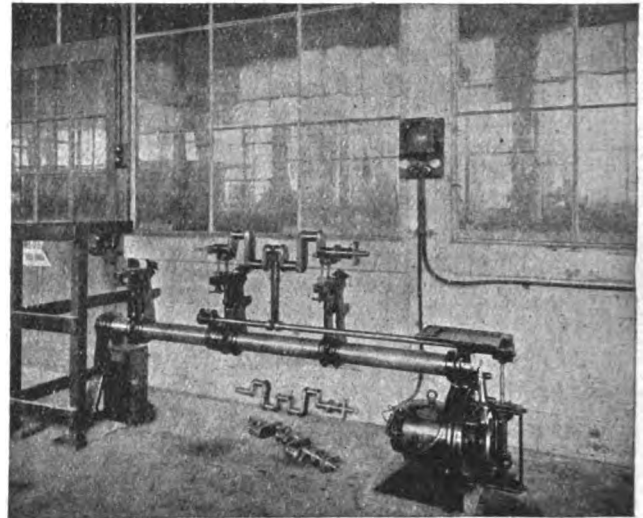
CRANK SHAFT TESTING MACHINE.
